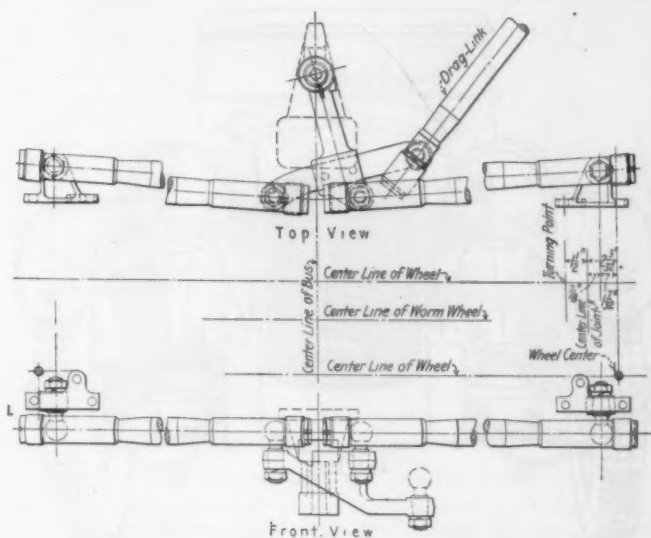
HEALEY-AEROMARINE STEERING-LINKAGE
